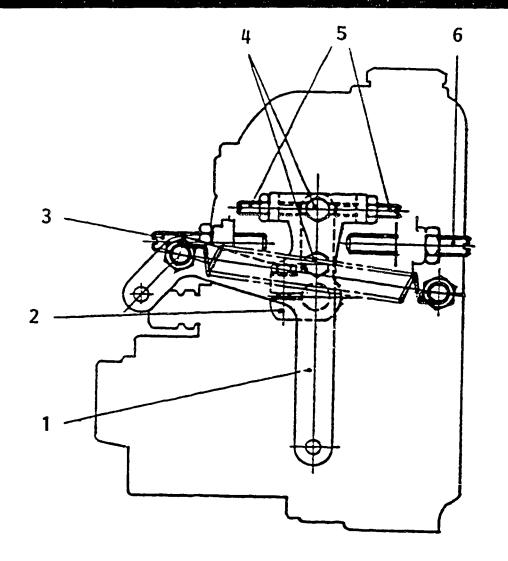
1 = Lever 2 = Lever 3 = Bolt 4 = Bolt 5 = Bolt
